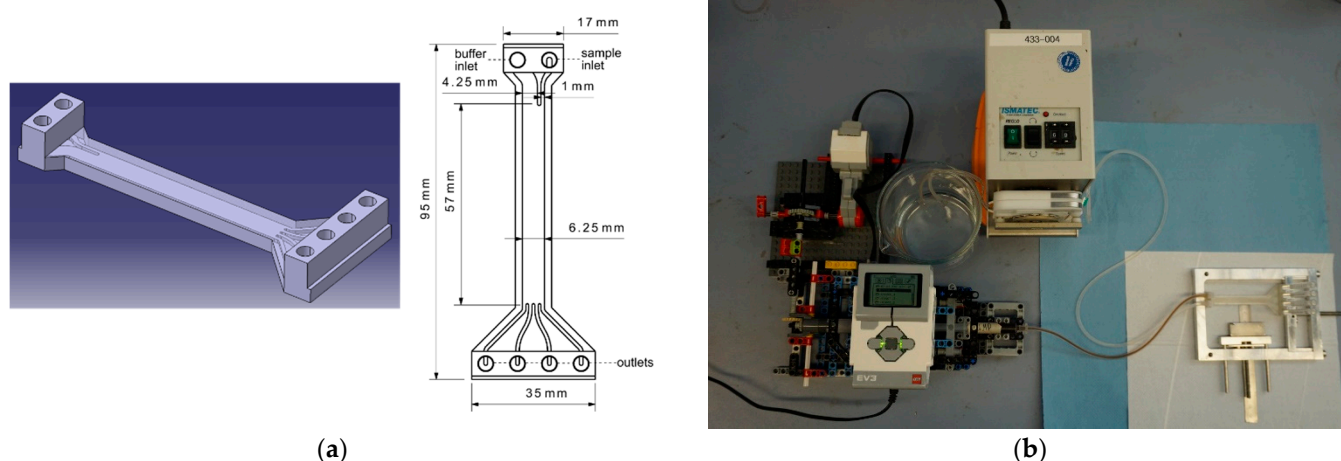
(a) Three-dimensional model and top view of the printed millifluidic chip. The sorting device features two inlets, one for the buffer and one for the samples to be sorted. During the passage, the particles are deflected into four different outlets. (b) Complete setup of the yeast sorting apparatus.
